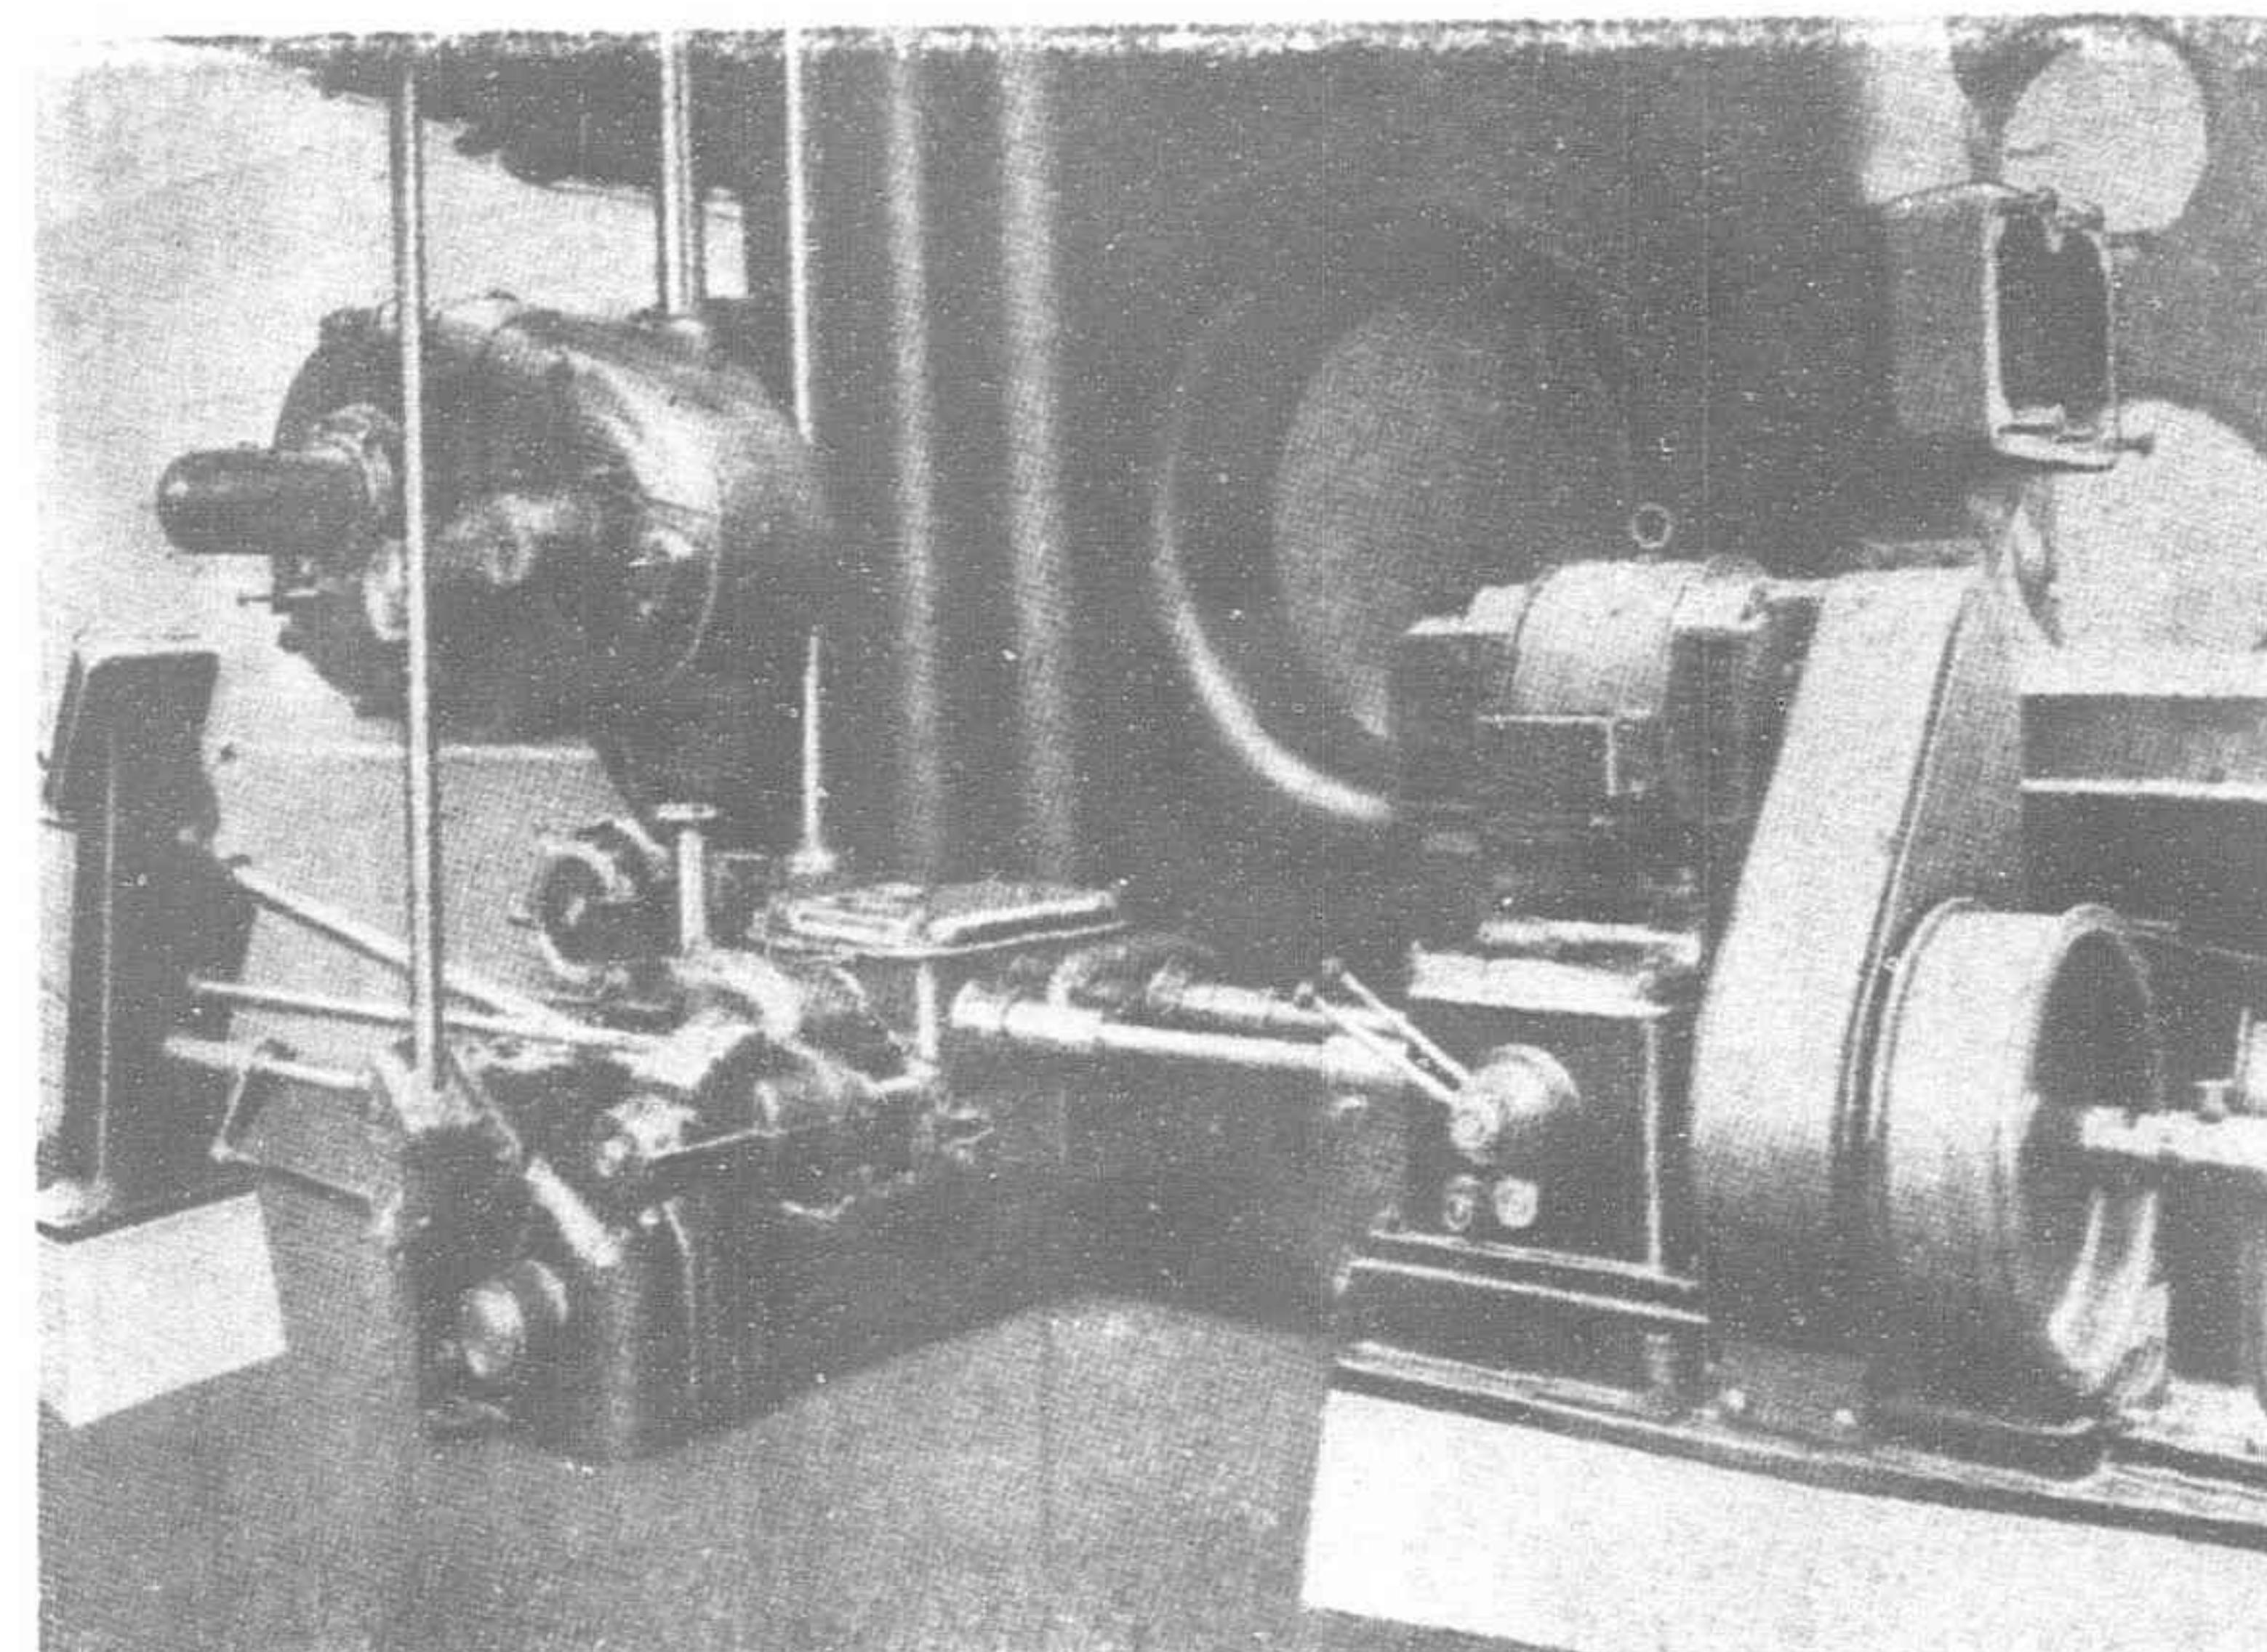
A 20 h.p. motor coupled to Feed Gear Box
